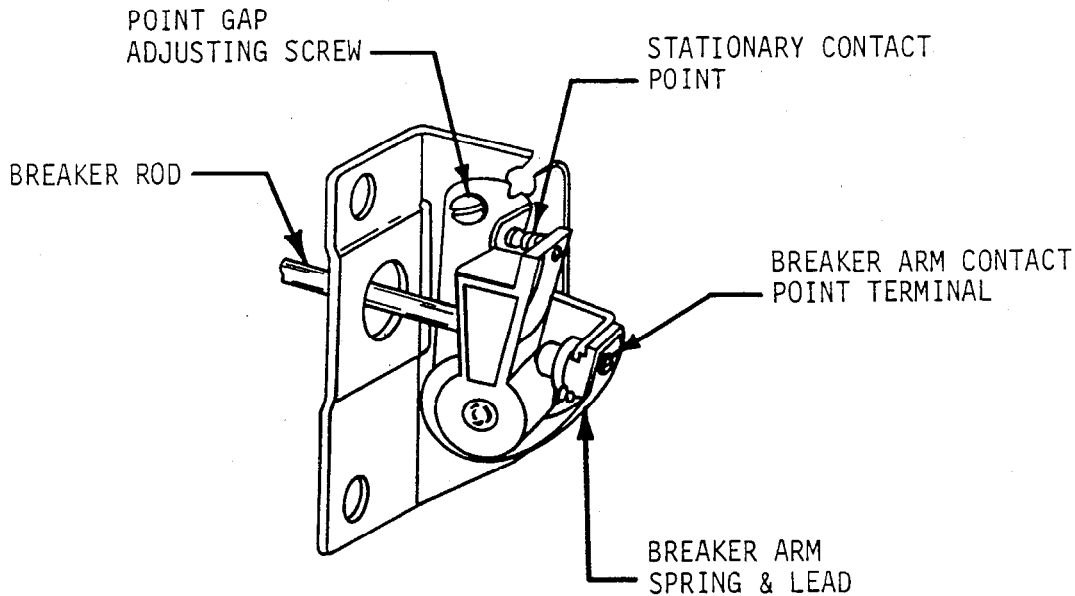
TYPICAL IGNITION BREAKER POINTS
